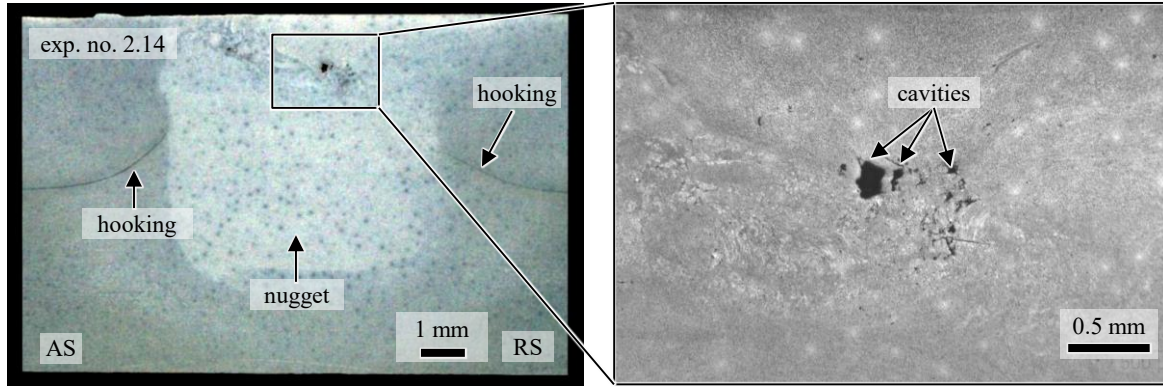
Example of a weld cross section (exp. no. 2.14) showing cavities inside the nugget and hooking
